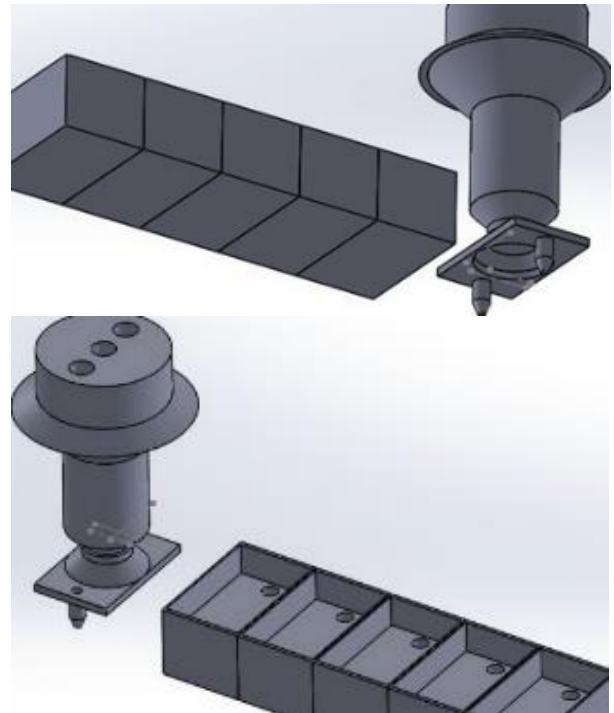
SolidWorks 2D drawing of rubber key tape and packaging simulation.
